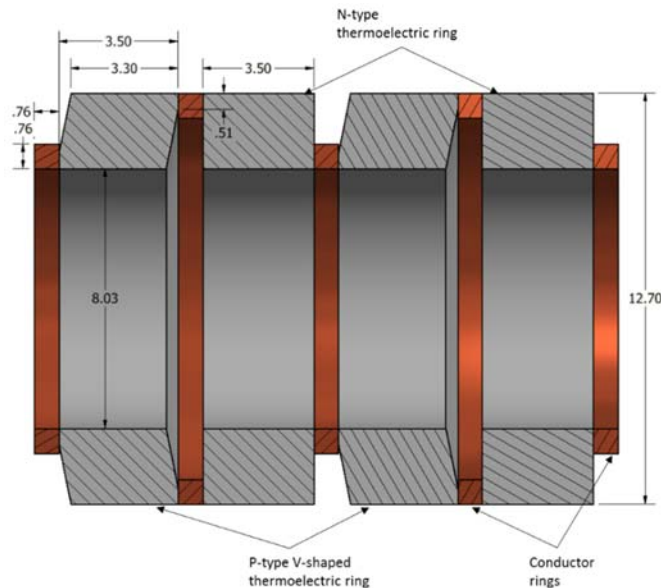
Proposed V-shaped TEG module design, dimensions in mm
